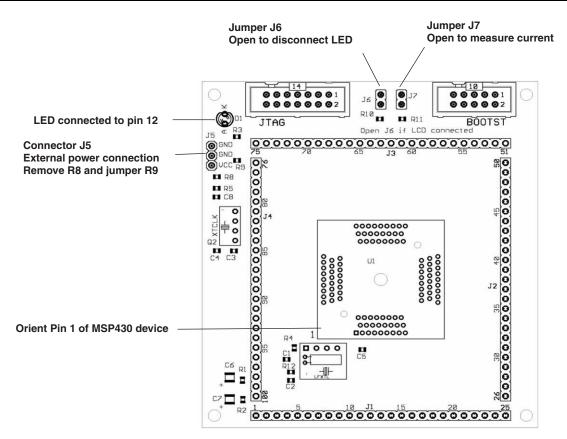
MSP-TS430PZ100 Target Socket Module, PCB
